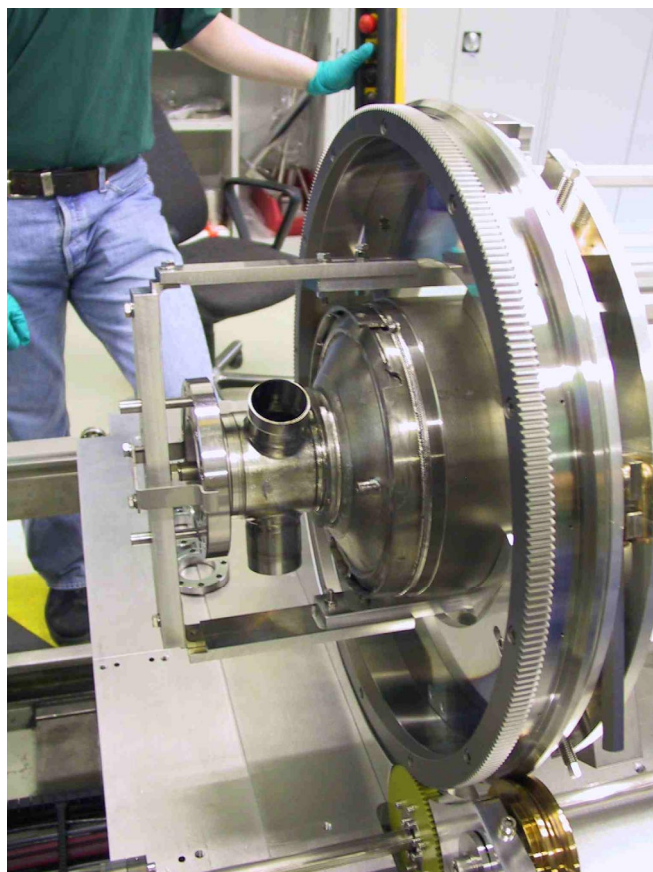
Welding fixture for flanges on multicell cavities with titanium tank connected
